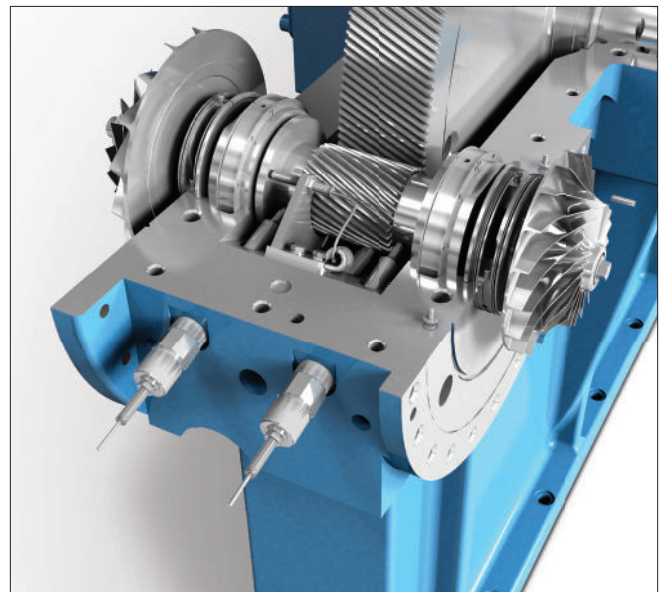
Axial displacement probe senses the thrust collar position for two-stage rotor assembly.
